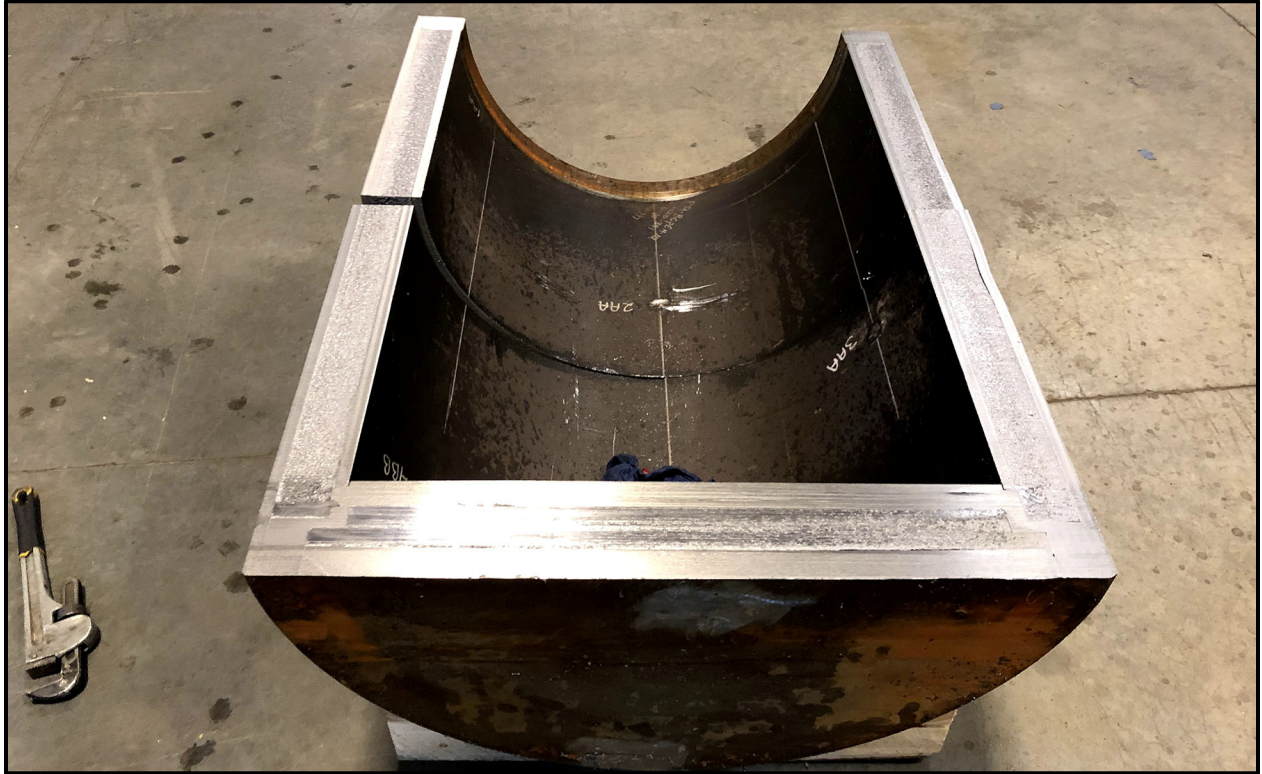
SC-55G2 18TU-10 Destructive Disassembly Overview
